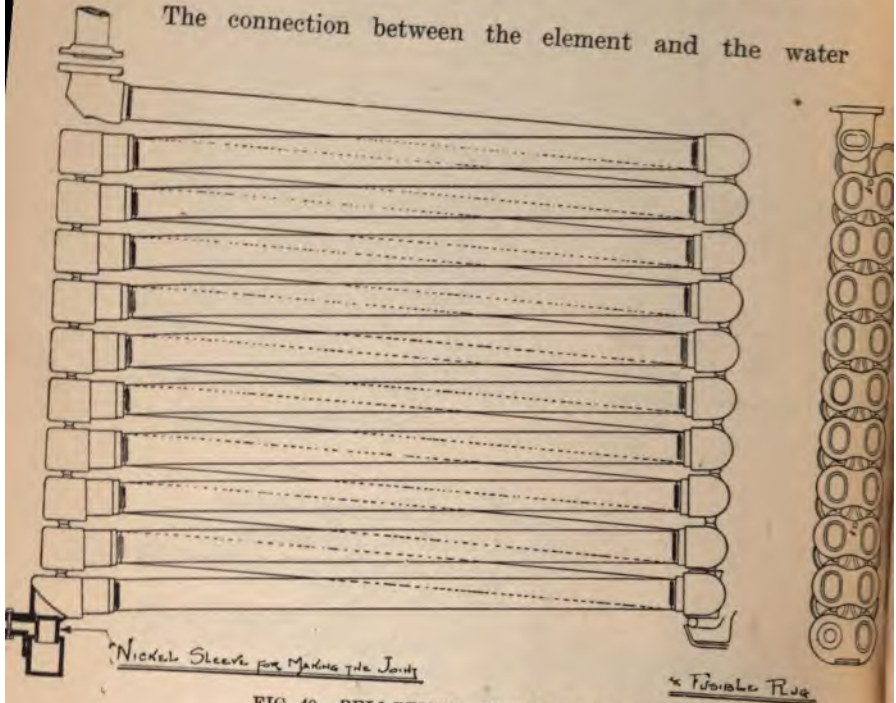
BELLEVILLE BOILER ELEMENT.
